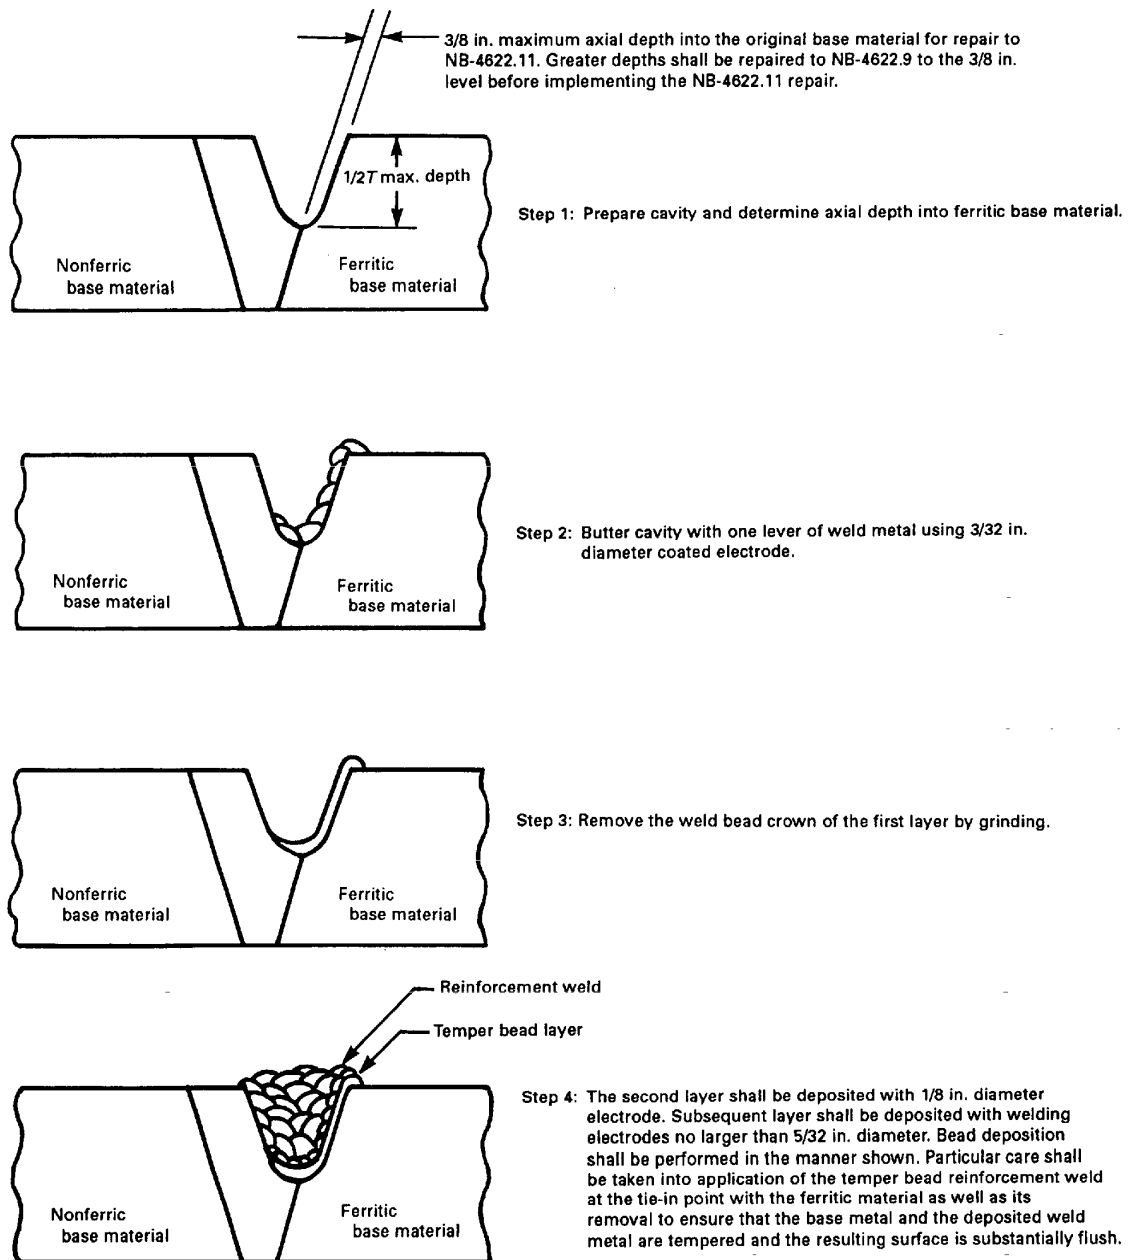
(c)(6)-1 TEMPER BEAD WELD REPAIR AND WELD TEMPER BEAD REINFORCEMENT OF DISSIMILAR METAL WELDS OR BUTTERING
